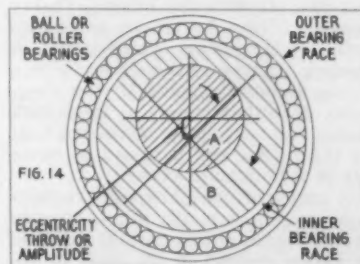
General principle of the "positive throw" type of vibrating mechanism: A is drive shaft; B is off-center part of shaft, or ring or disk which carries bearings. The outer race is on the screen body
